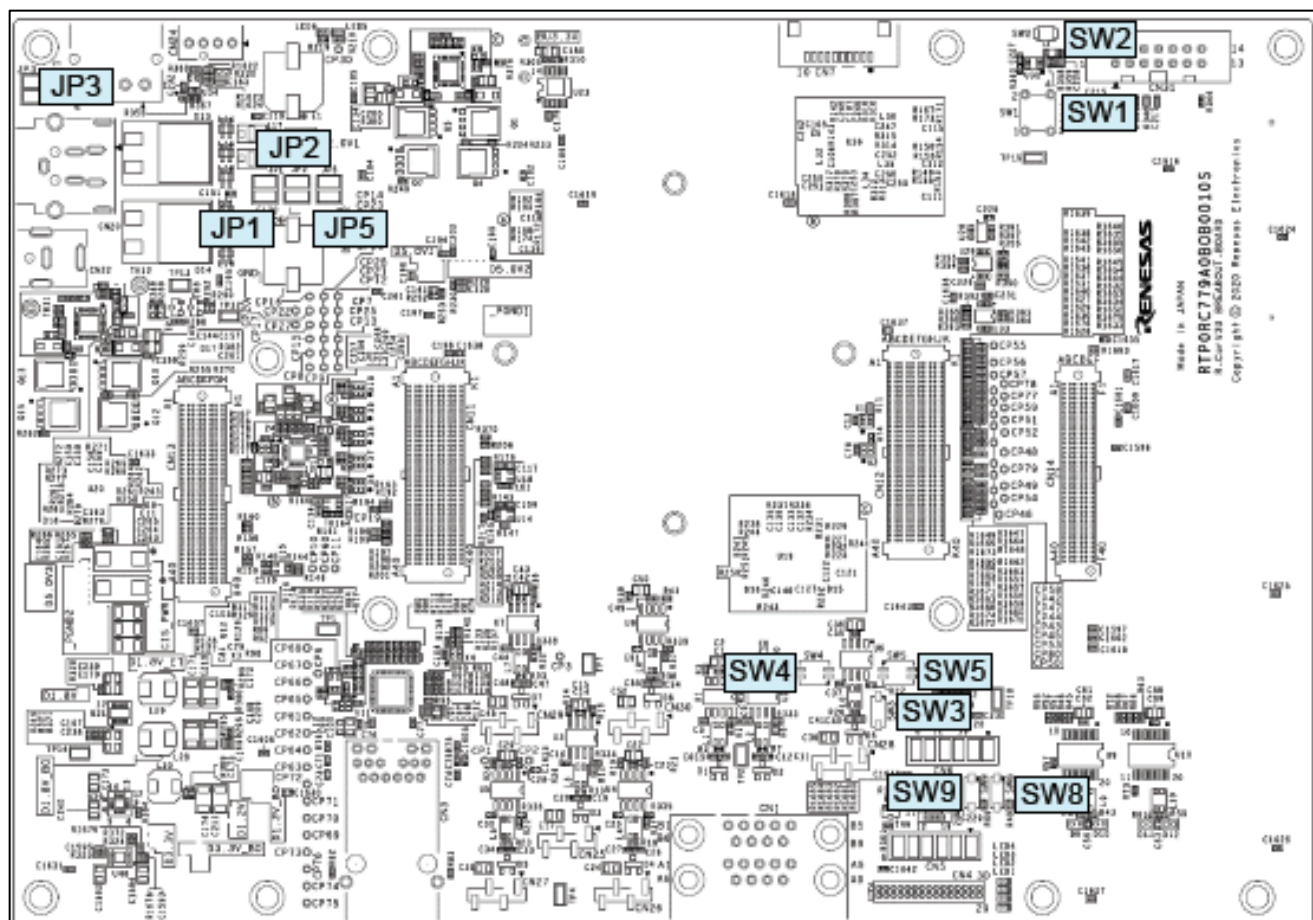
Location of Switches on the Breakout Board (Component Side)
